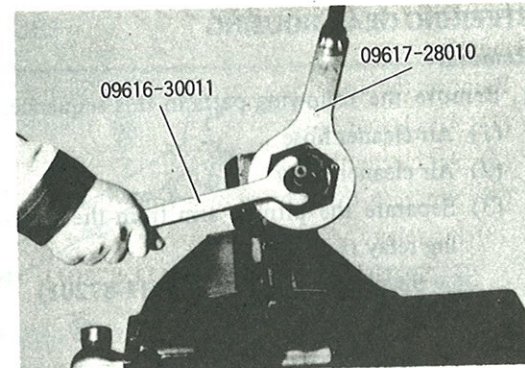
Removing Lock Nut & Adjusting Screw
